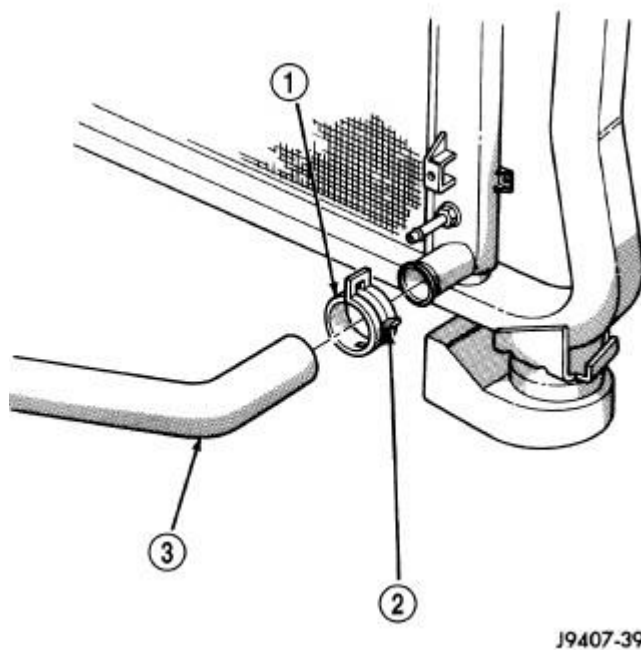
CLAMP NUMBER/LETTER LOCATION - TYPICAL
